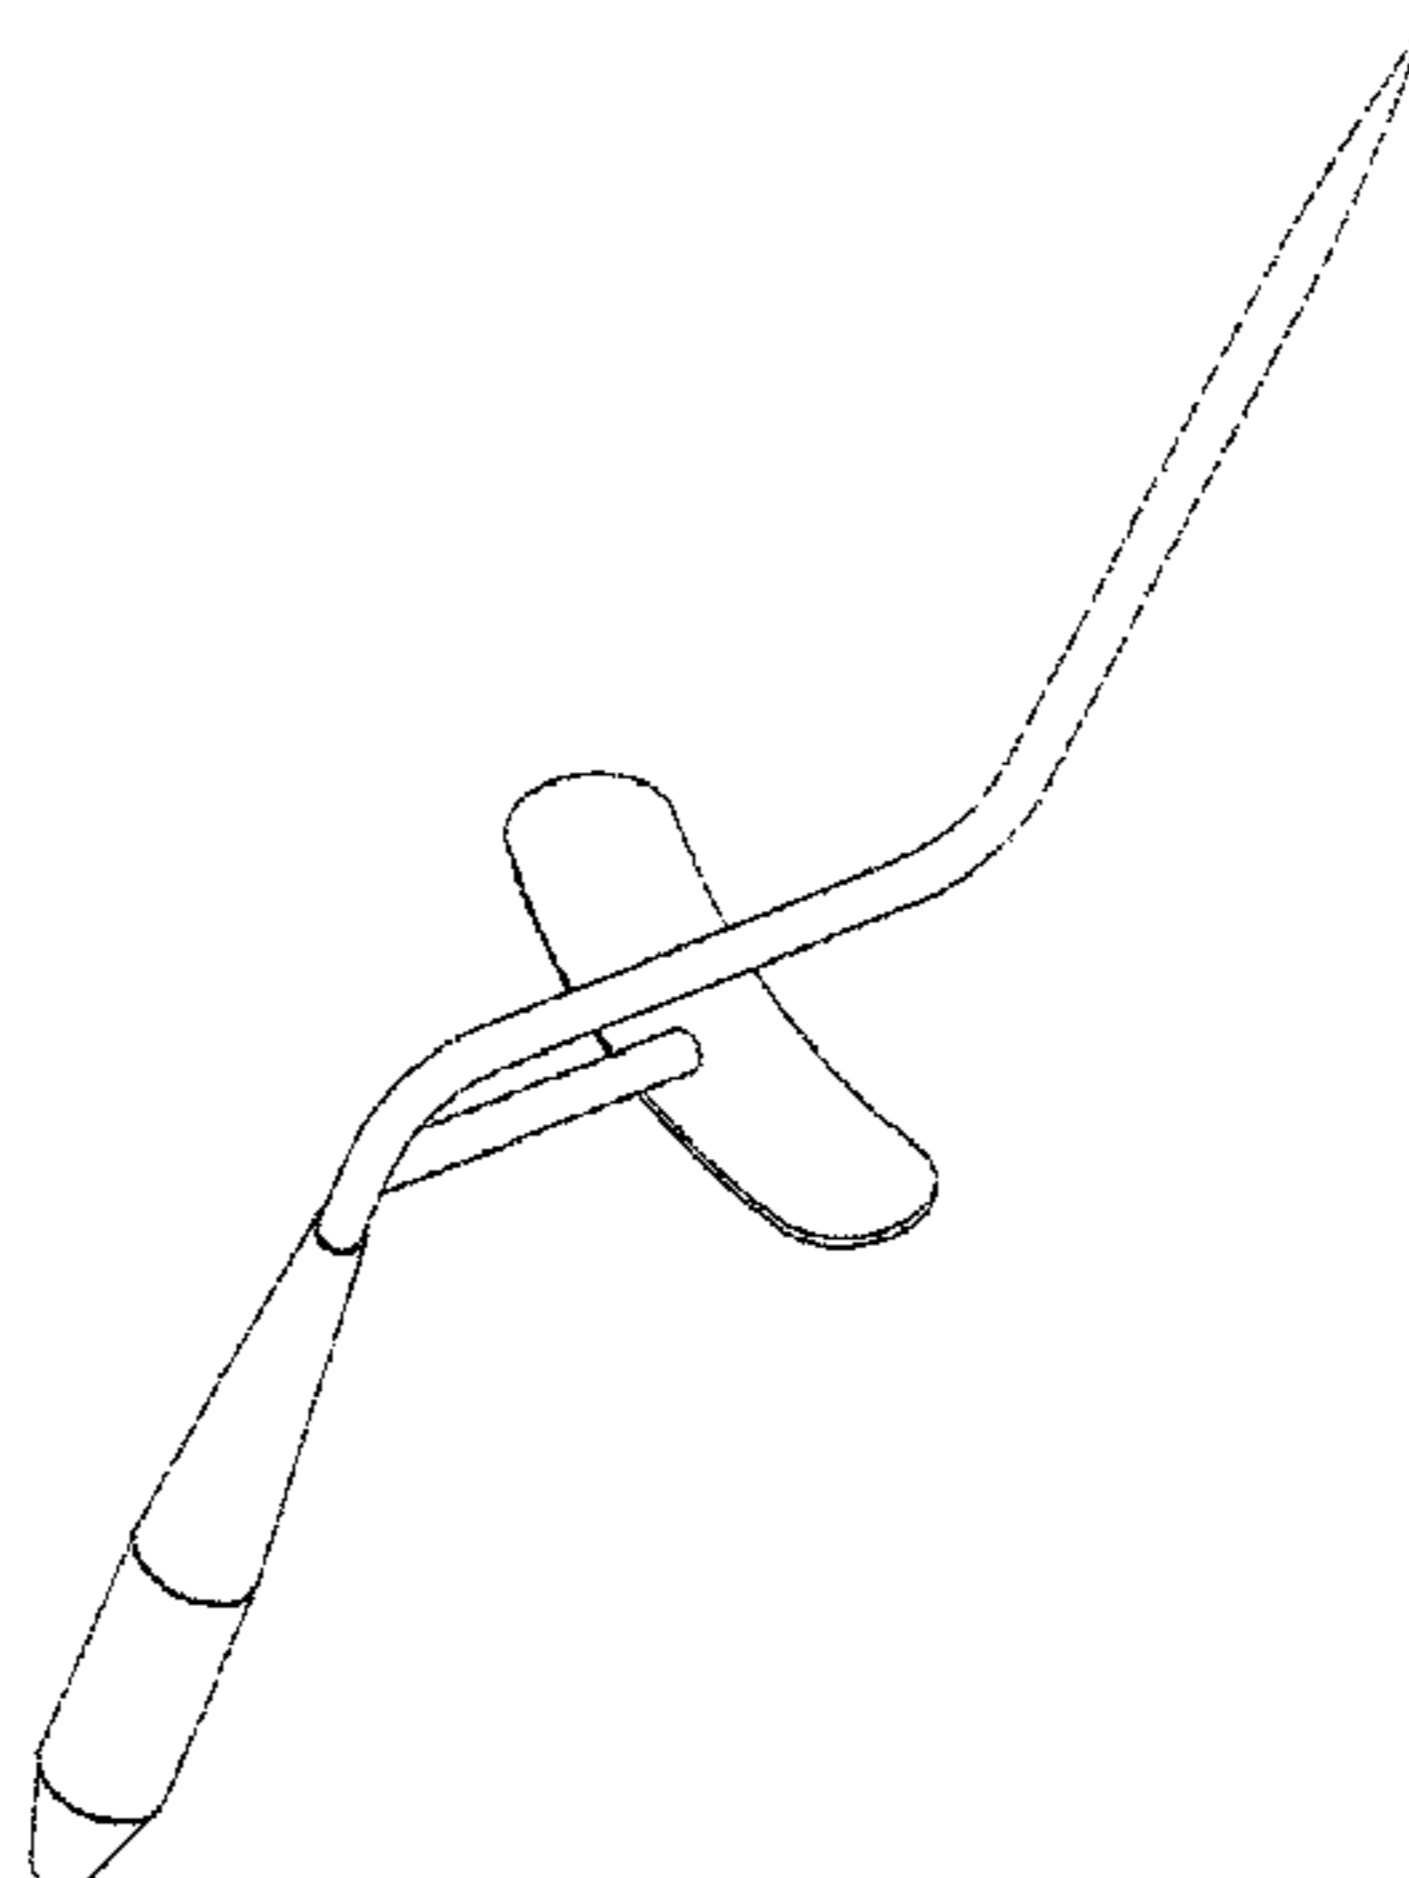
is a top perspective view of a fondue fork, according to a first embodiment;
